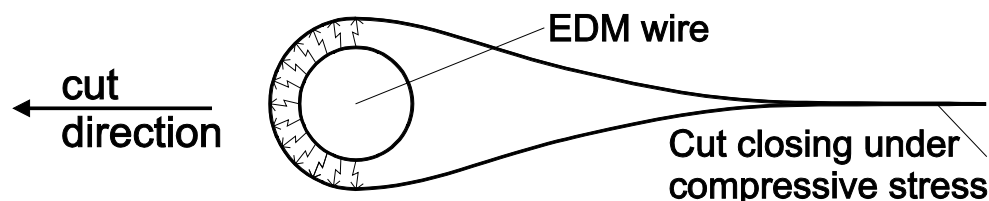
Even cutting into compressive stress, constraint limits the amount the cut surfaces can pinch in close behind the wire.
